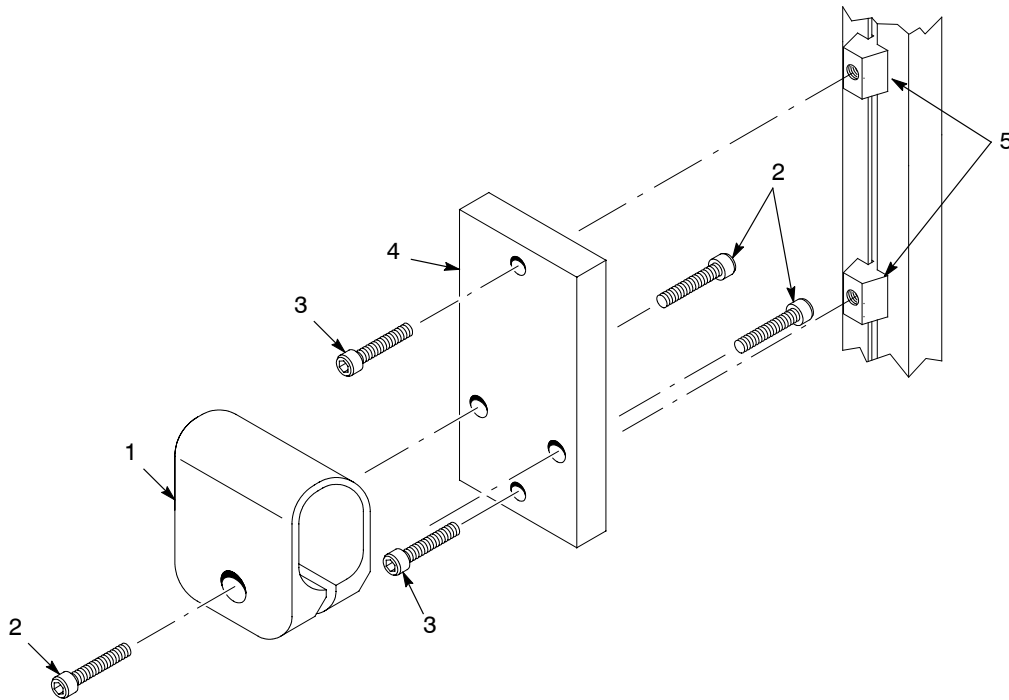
Extrusion Spray Gun Mount Assembly for Tube-Mount Spray Guns
